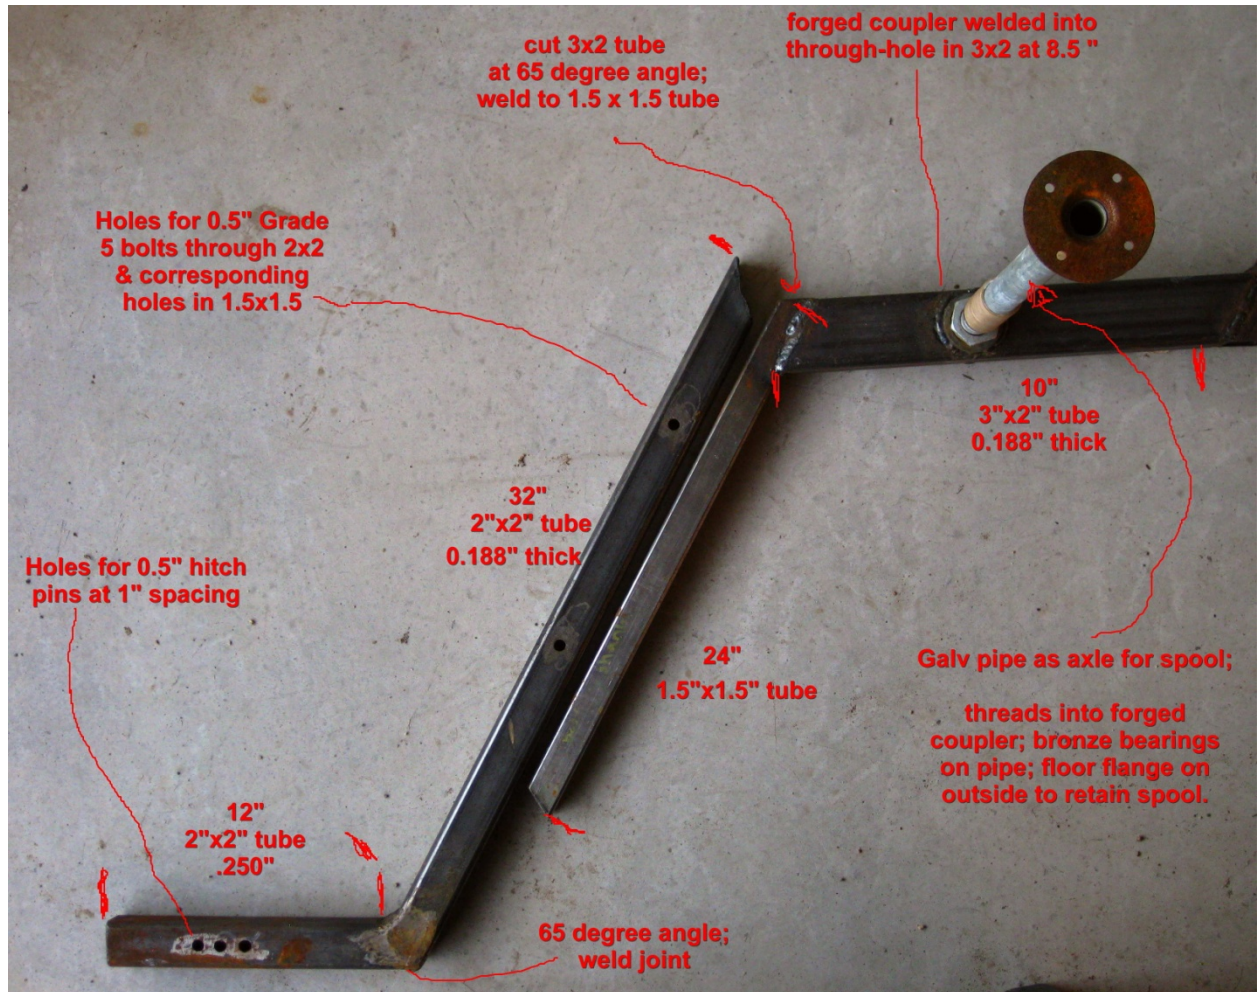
Figure B: Spooler specifications. The frame can be built in one piece instead of two, if desired.
